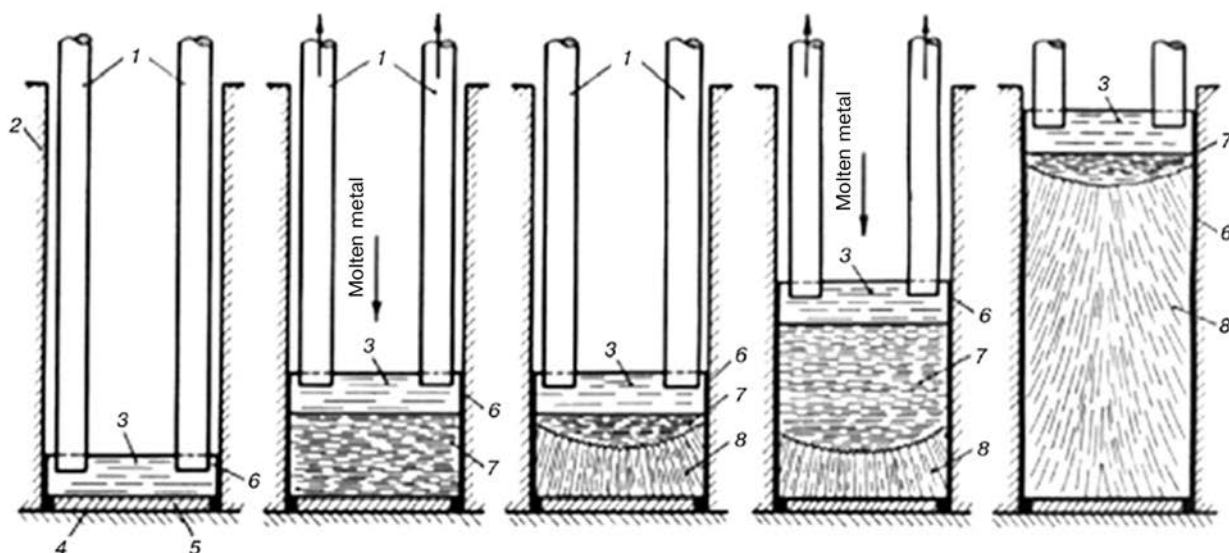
Scheme of a portion electroslag casting: 1 — non-consumable electrodes; 2 — mould; 3 — slag pool; 4 — bottom plate; 5 — primer; 6 — skull; 7 — metal pool; 8 — solid metal
